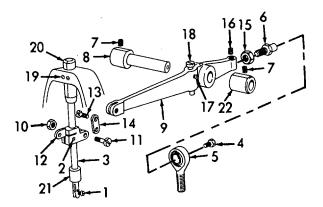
Needle Bar Drive Mechanism, Removal.
